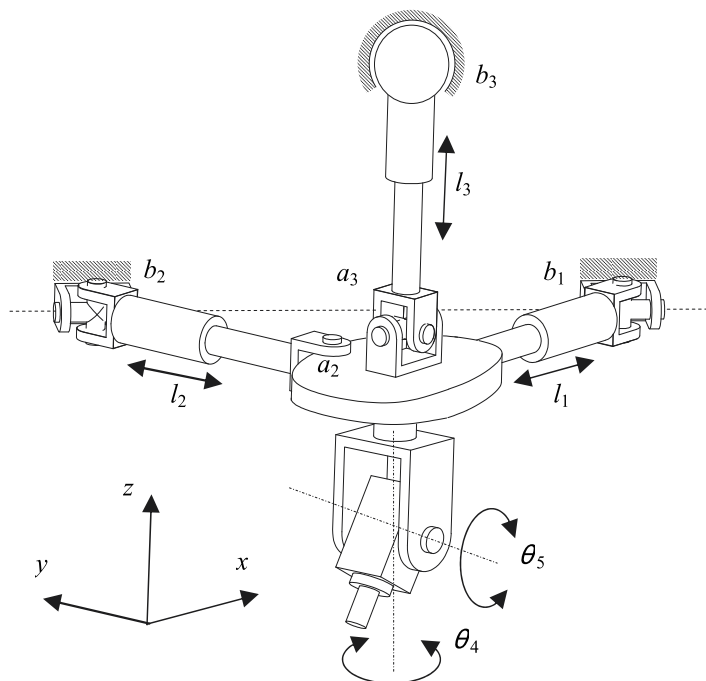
A schematic of a proposed hybrid machine tools mechanism
